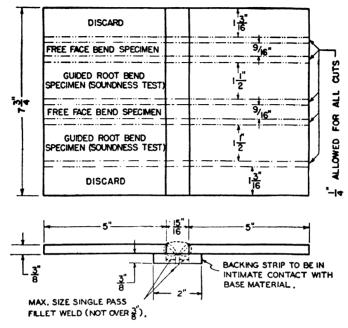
Test Weld for Free-bend and Soundness Tests. It should be noted that this sample must be cut into six pieces. Four of the pieces are used for test purposes
